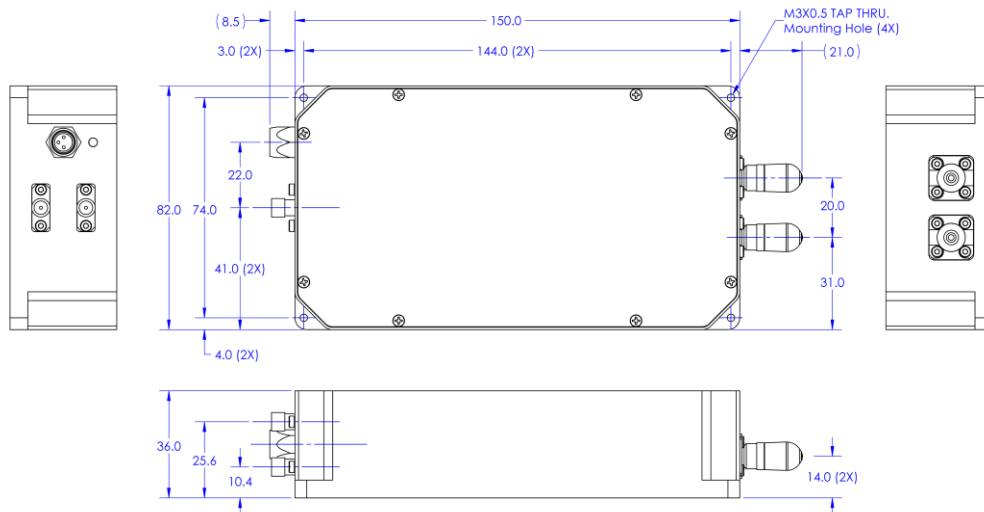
, Mechanical drawing of the integrated 90deg hybrid with balanced receiver
